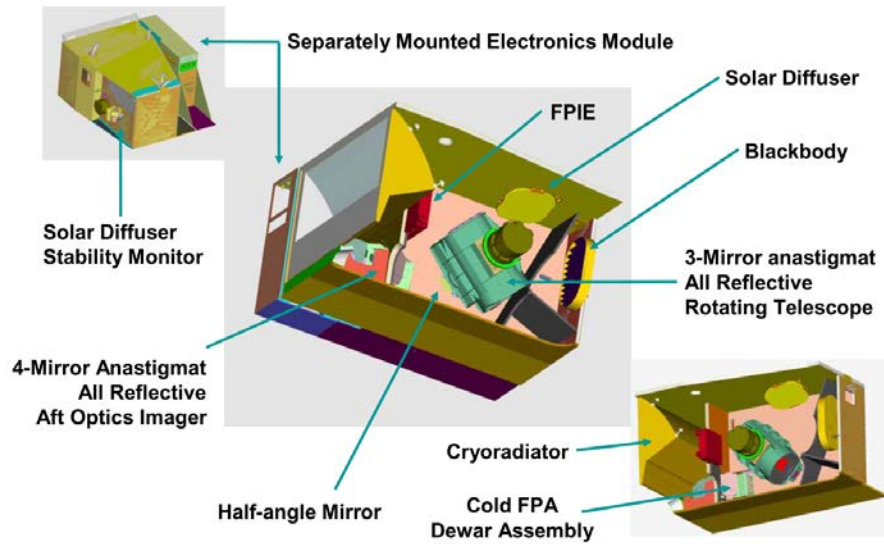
A 3 dimensional view of the VIIRS Opto-Mechanical Module and on-board calibrators [7].
